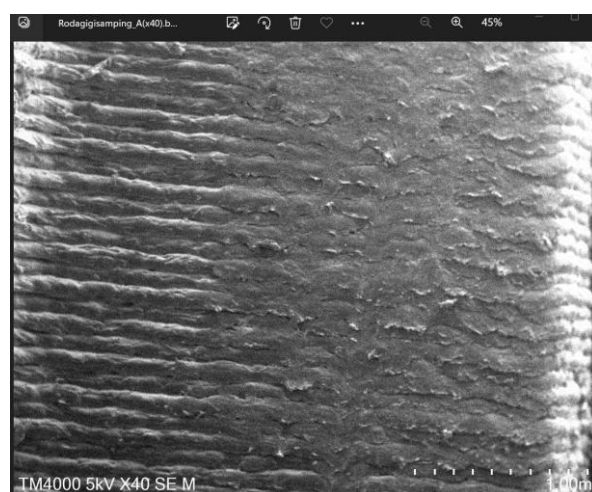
Photo of the tooth surface after the torsion test was carried out in dry conditions on Onyx material
